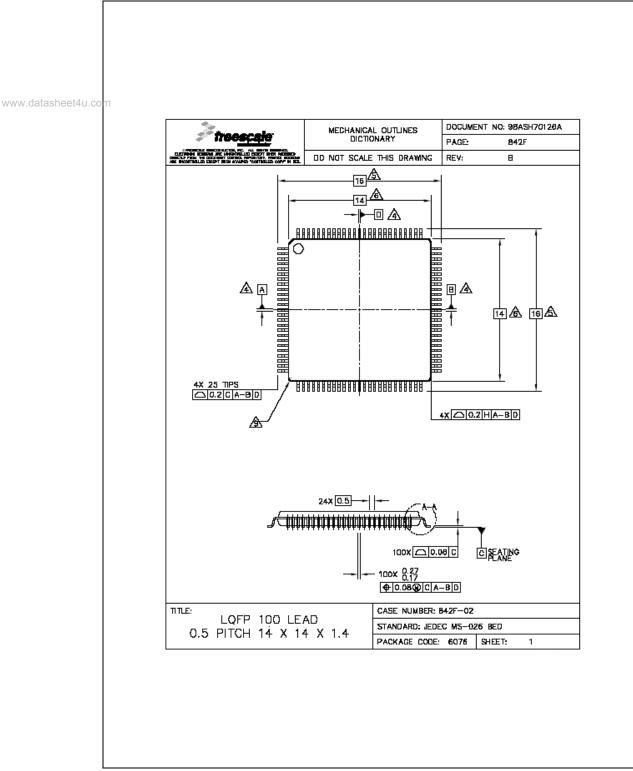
100 LQFP package mechanical drawing (1 of 4)
